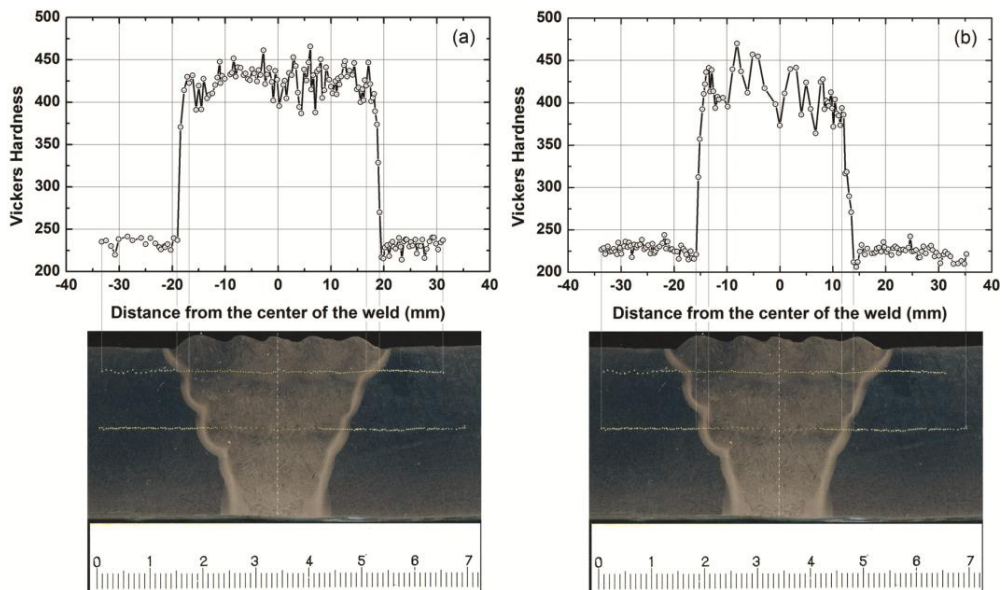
Hardness profile measured at distances of 5 mm (a) and 16 mm (b) from the weld surface across the weld metal of the as-welded P91 steel.
